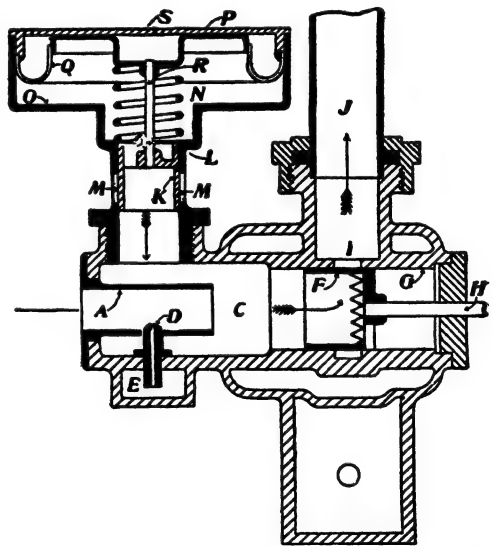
COMPLICATED MODERN CARBURETTER, WITH AUTOMATIC ADJUSTMENT ACCORDING TO THROTTLE OPENING AND PISTON SPEED
